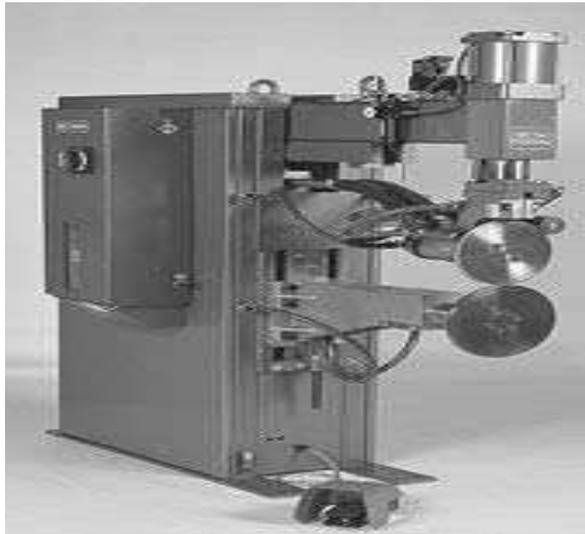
Typical resistance seam welder showing the copper wheel electrodes.
